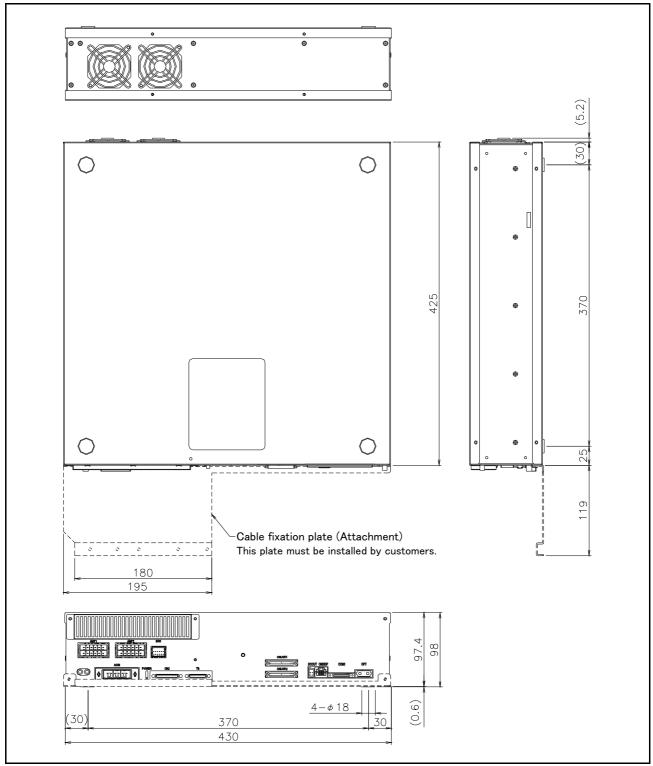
Outside dimensions of drive unit (CR751: RV-4F/7F series)
